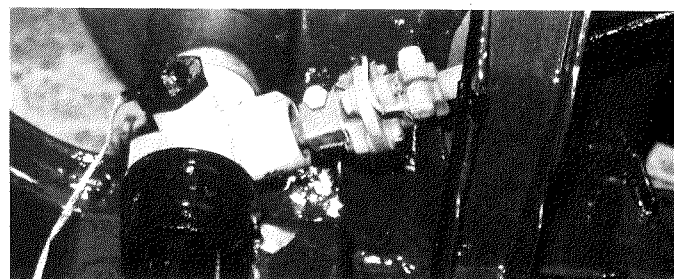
Check condition of steering column coupling. I have removed the engine for clarity!
